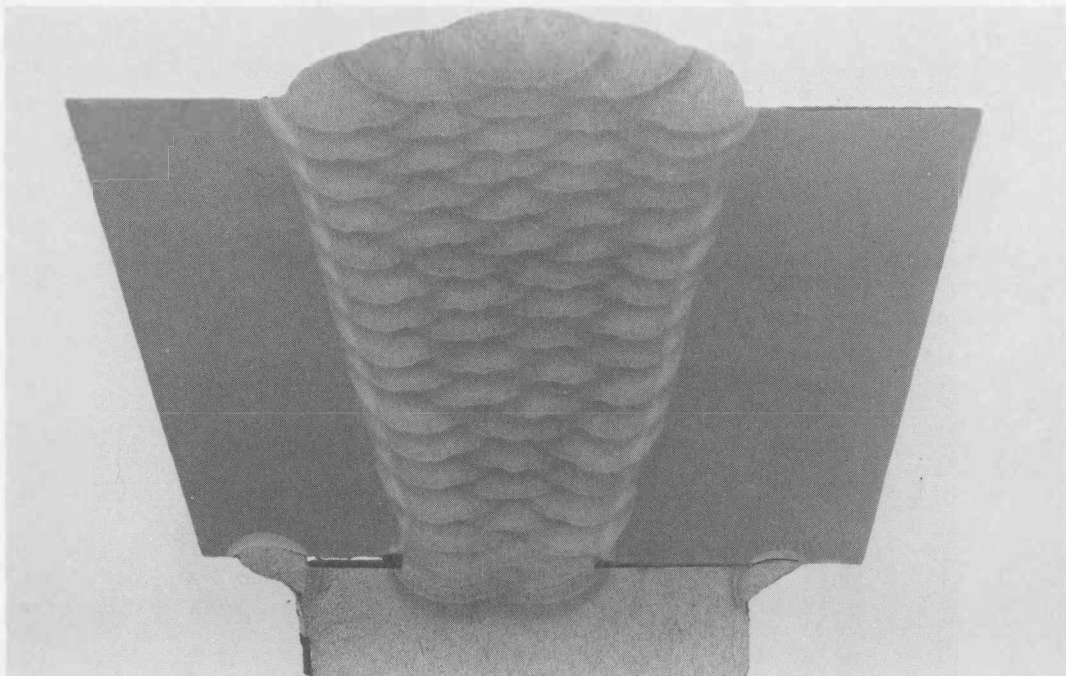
Submerged arc weldment in 50-mm-thick plate of modified 9 Cr-1 Mo steel.
